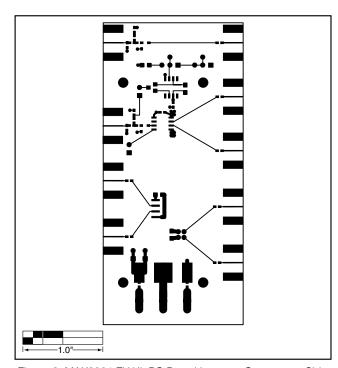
MAX3864 EV Kit PC Board Layout—Component Side
